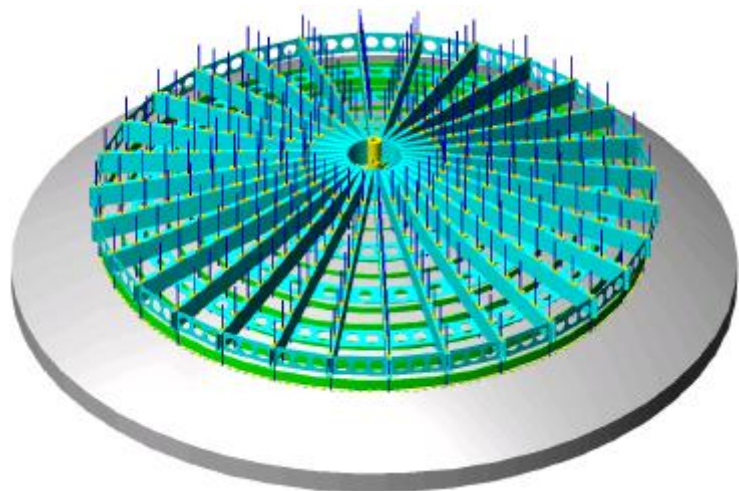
3-m tool made from nested rings, supported by guide rods to a large frame.
